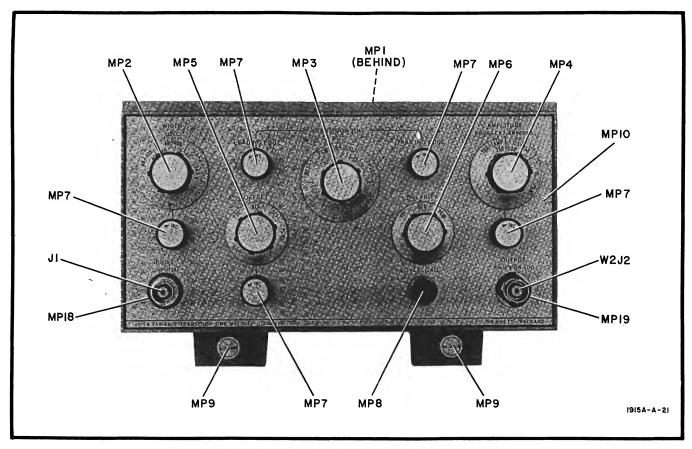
Chassis Mounted Parts Locations (Front View)
